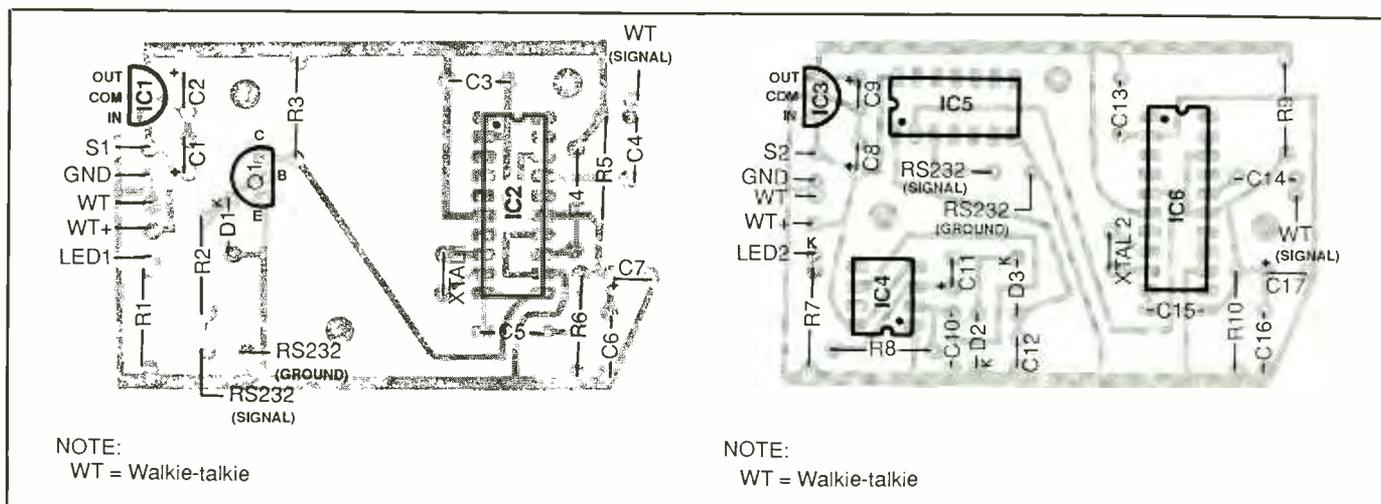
Wiring guides for the transmitter (A) and receiver (B) pc boards. Use these as rough guides to component layout if you wire the circuits on perforated board.
